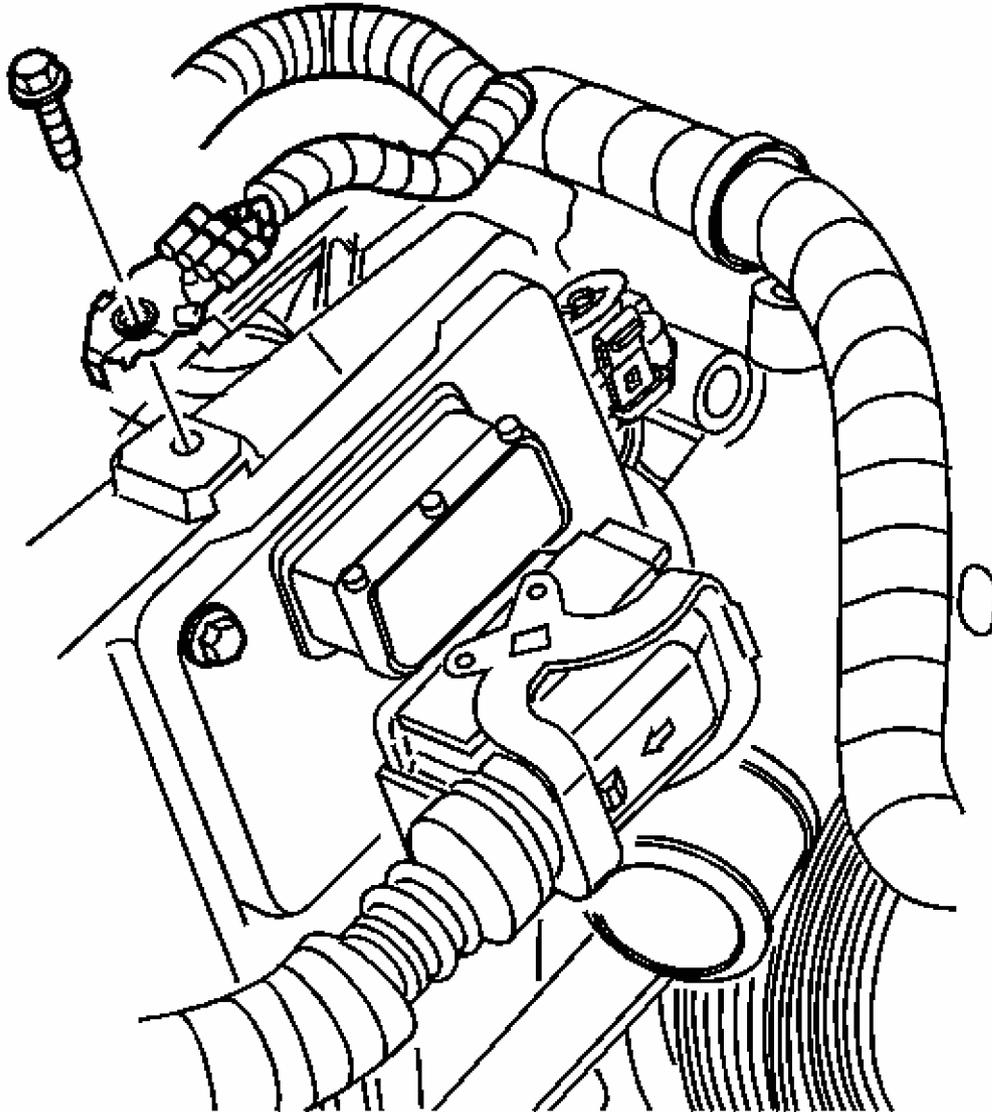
View Of Right Camshaft Position Actuator Valves Electrical Connectors
